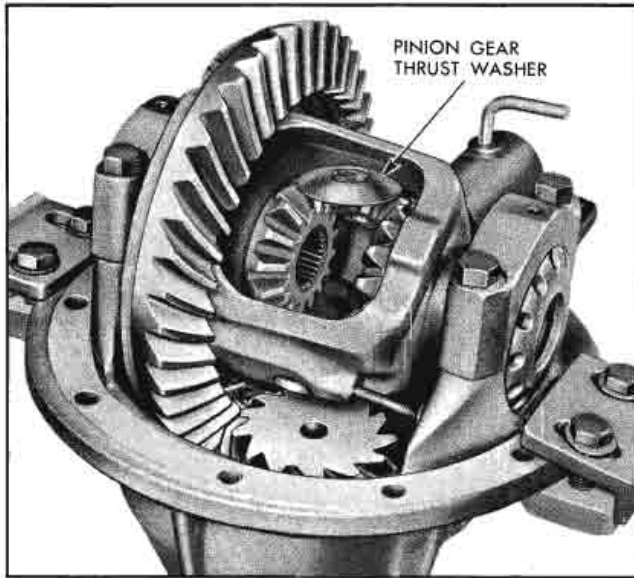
Placing Pinion Gear Thrust Washer in Position
